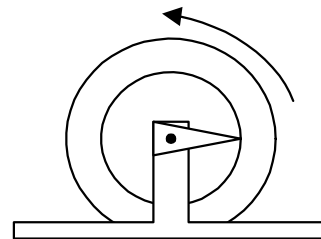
Boring operation with a fixed tool and rotating workpiece.
